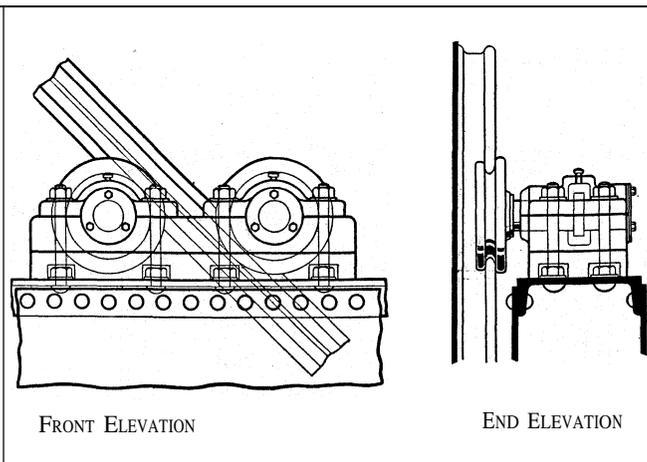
FRONT AND END ELEVATIONS OF SPIRAL GUIDE RUN BETWEEN SET OF ROLLERS
